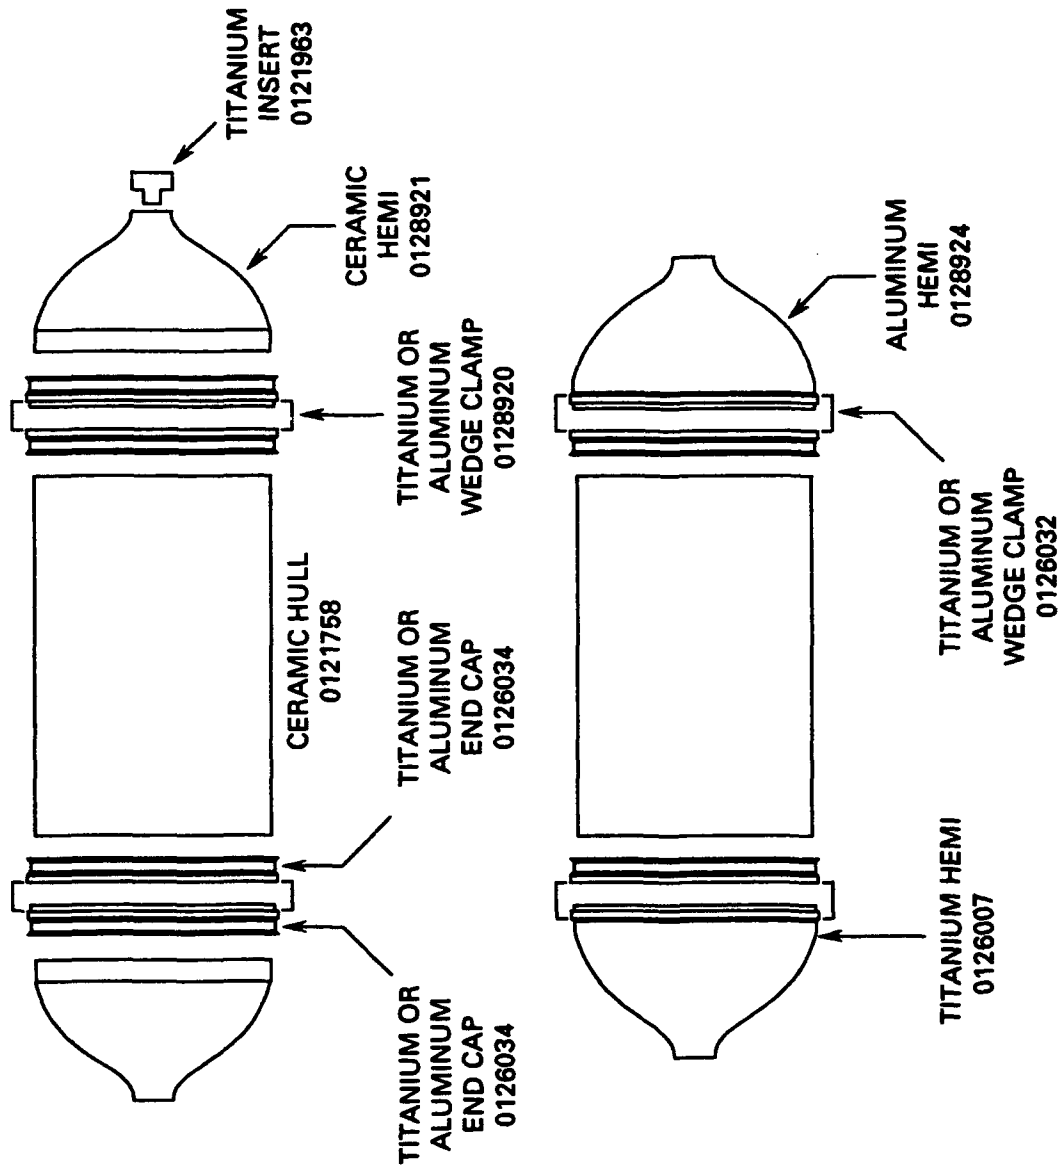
Typical housing assemblies with drawing numbers (single cylinder housing).
